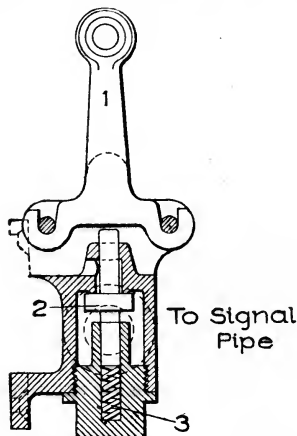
Section through Car Discharge Valve in Westinghouse Air-Signal System.
